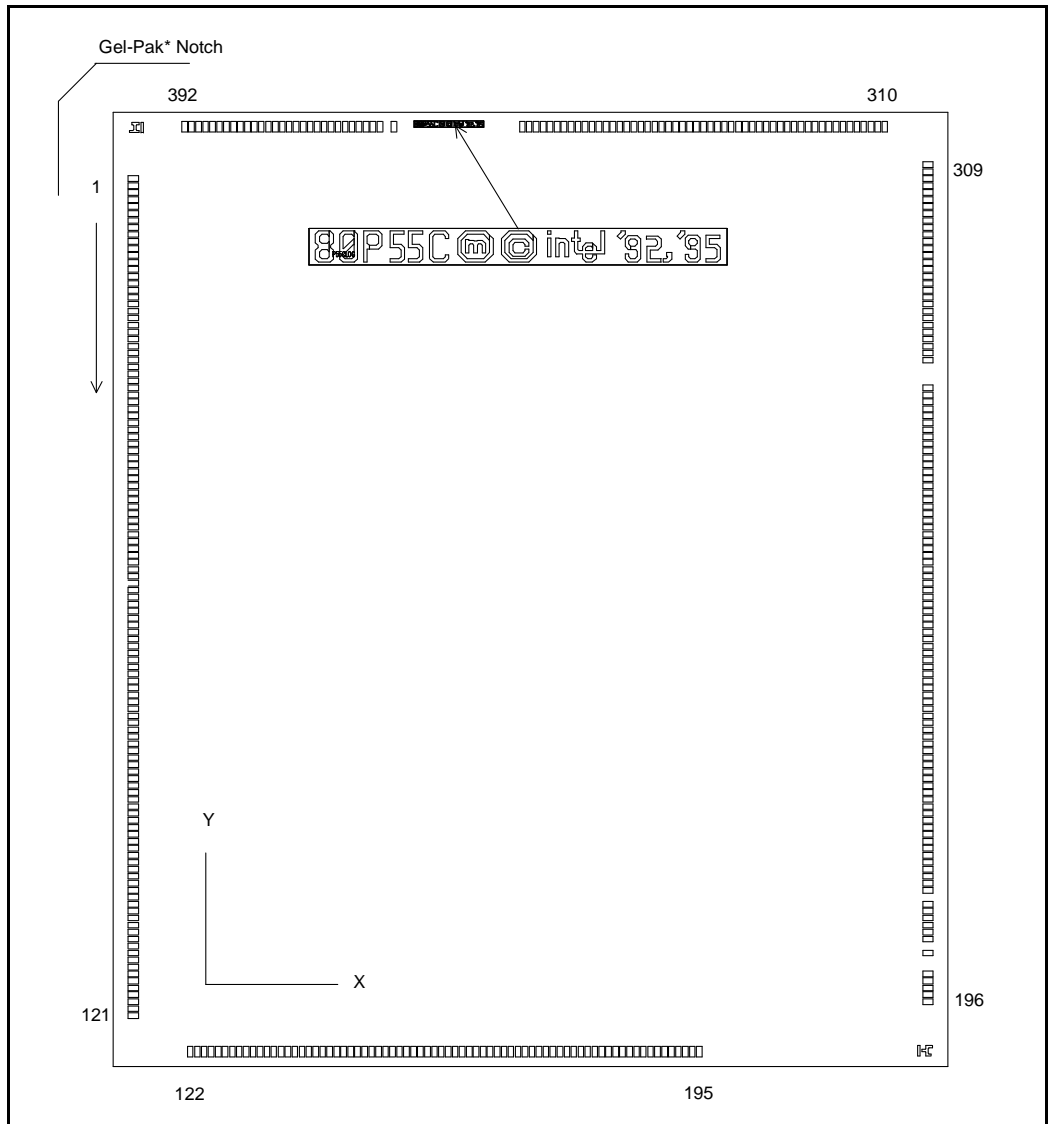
Mobile Pentium® Processor with MMX™ Technology Die/Bond Pad Layout
